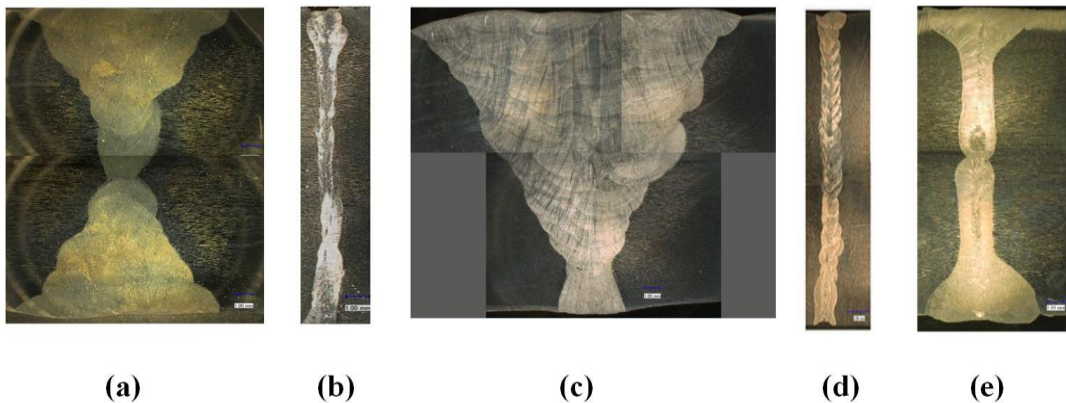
Welding techniques for 20 mm thick plates
